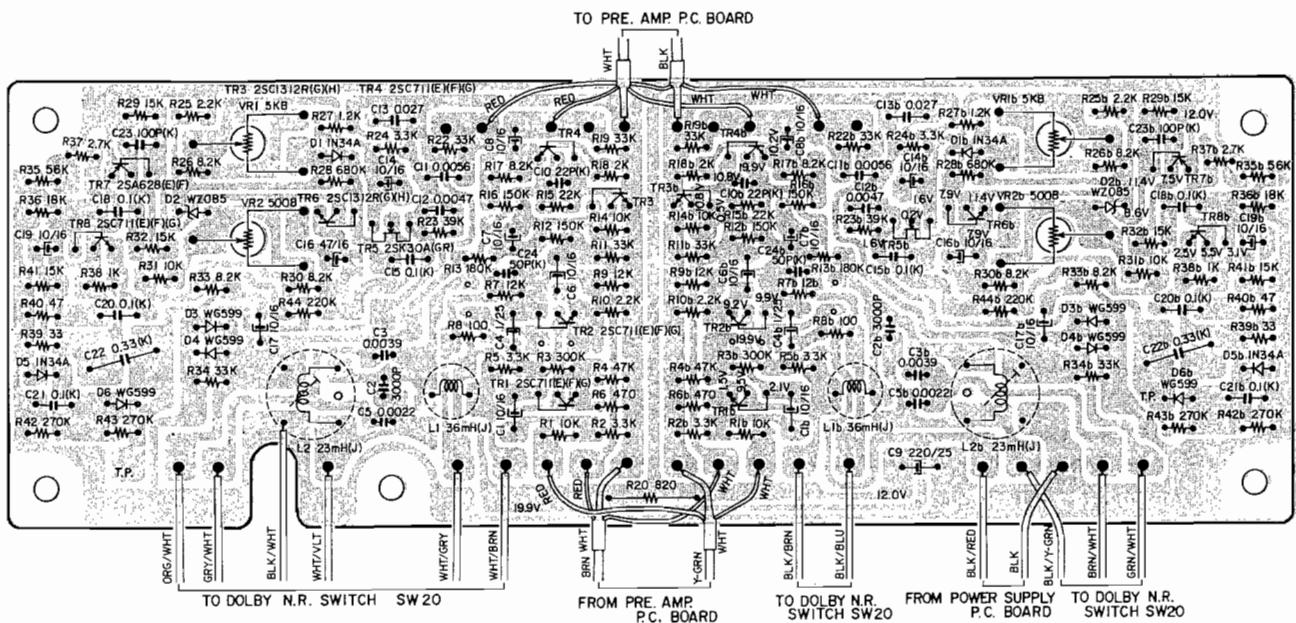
Dolby N.R. P.C. Board CP-5003 (Reverse Side)
